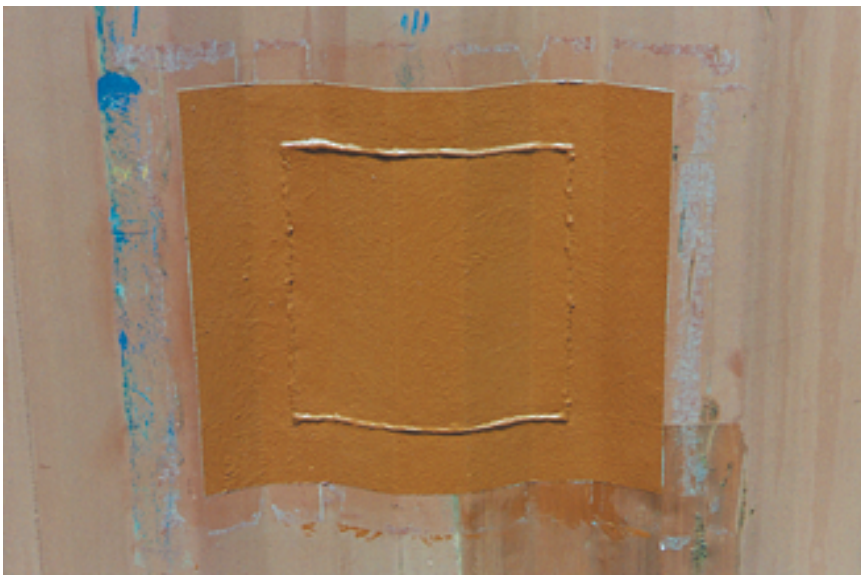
(to left) / Completed panel insert repair, fully top coated
